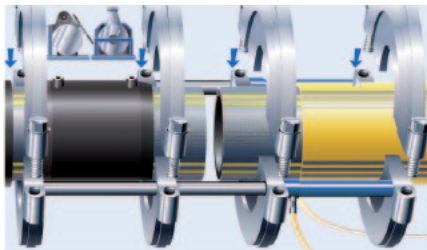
Clamping the pipe ends in the butt fusion welding machine
